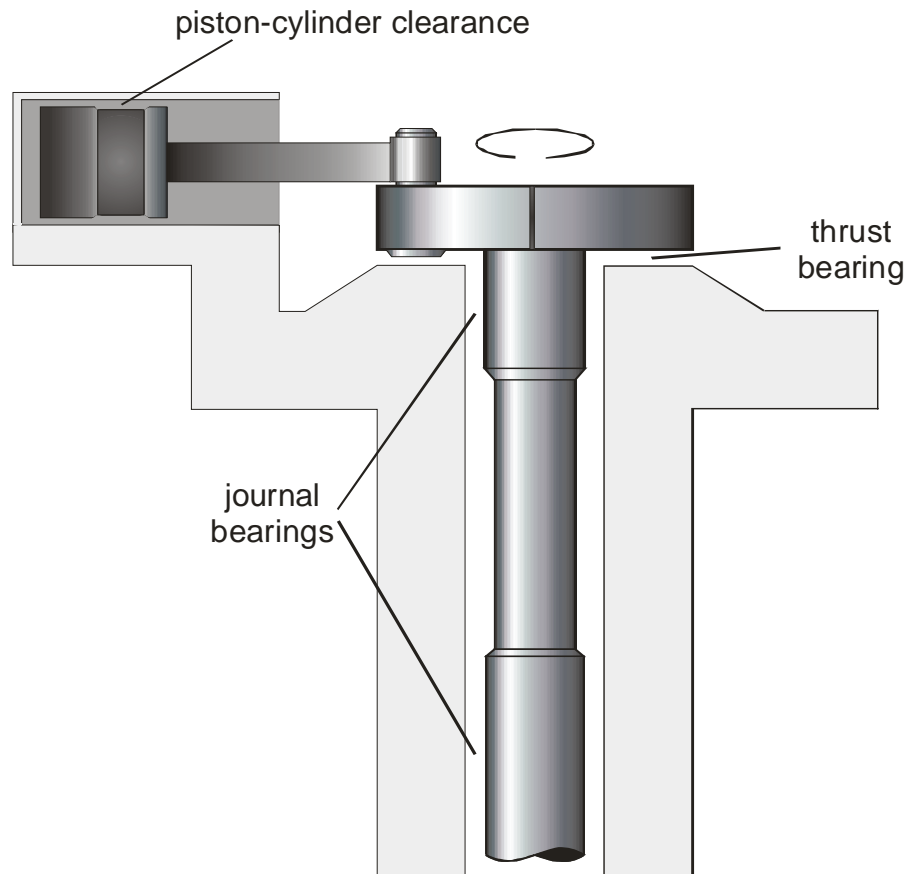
Piston and bearings present inside a reciprocating compressor.
